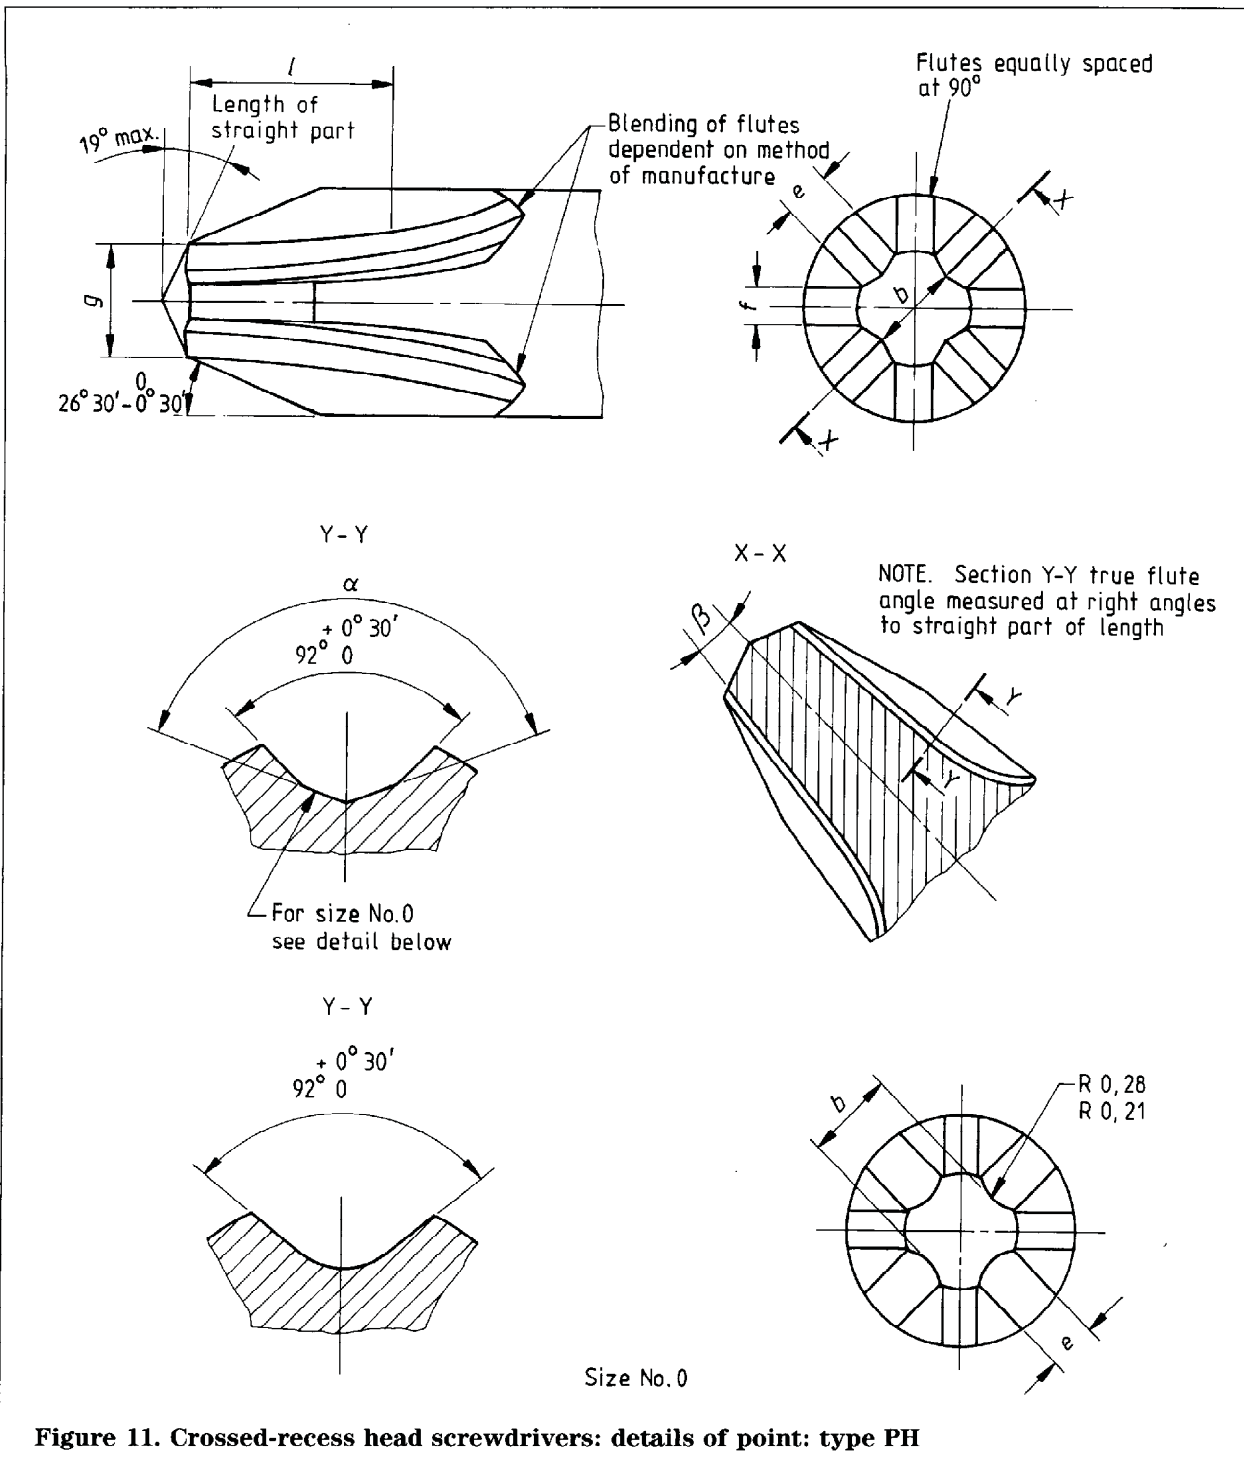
Crossed-recess head screwdrivers: details of point: type PH
